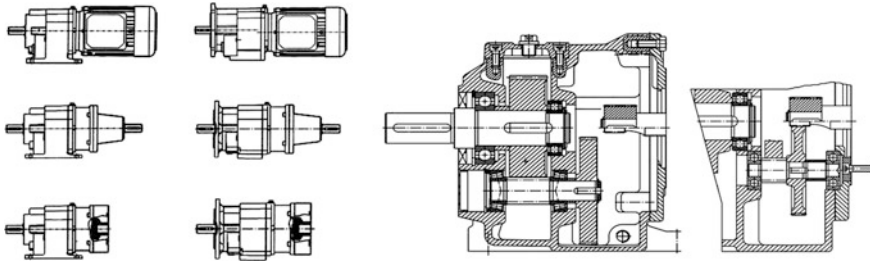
Characteristic solutions for motor reducer marked SK with special (reducer-type) motor, for motorless reducer and for IEC motor adaptor (*NORD*)
